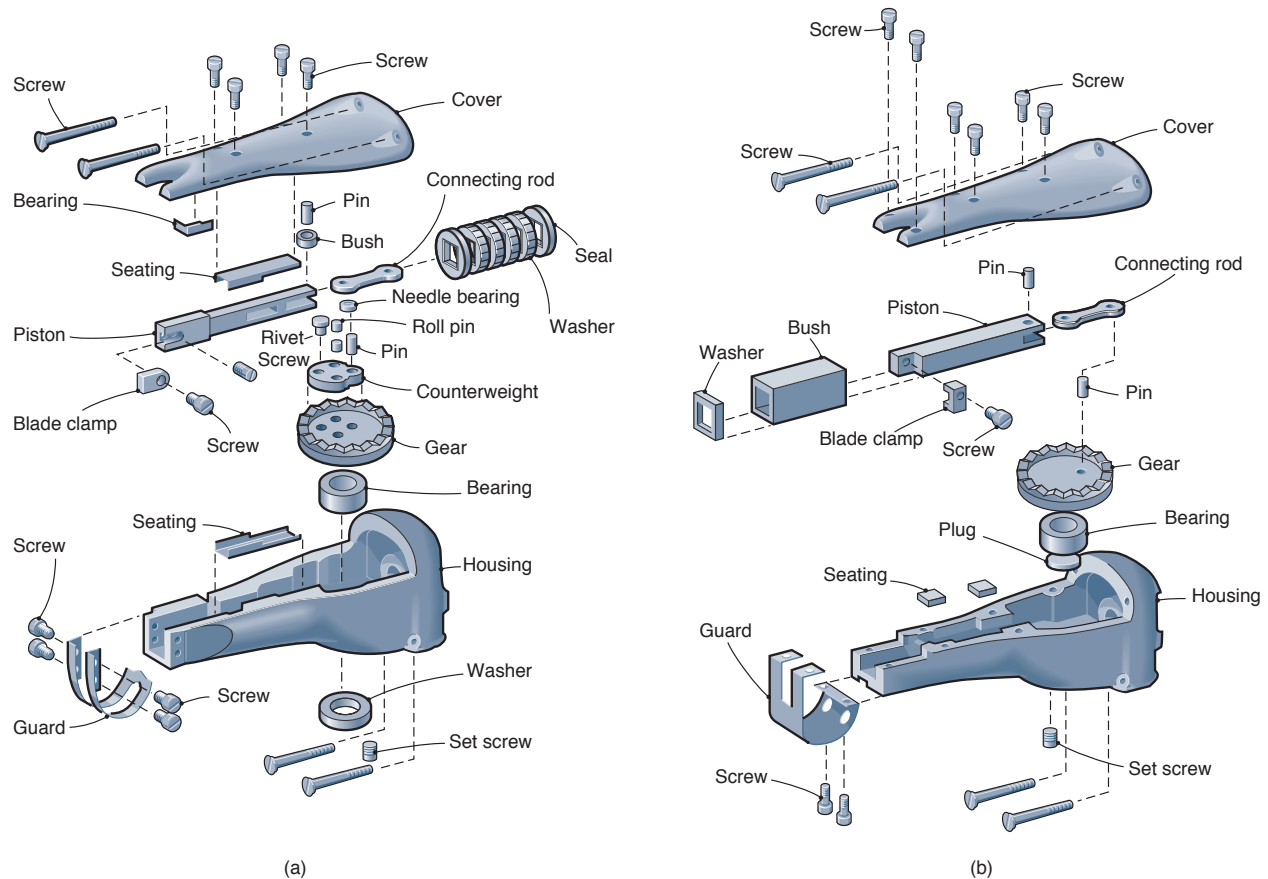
Effect of manufacturing and assembly considerations on the design of a reciprocating power saw. (a) Original design, with 41 parts and 6.37-min assembly time; (b) modified design, with 29 parts and 2.58-min assembly time. *Source:* Adapted from Boothroyd [1992].
